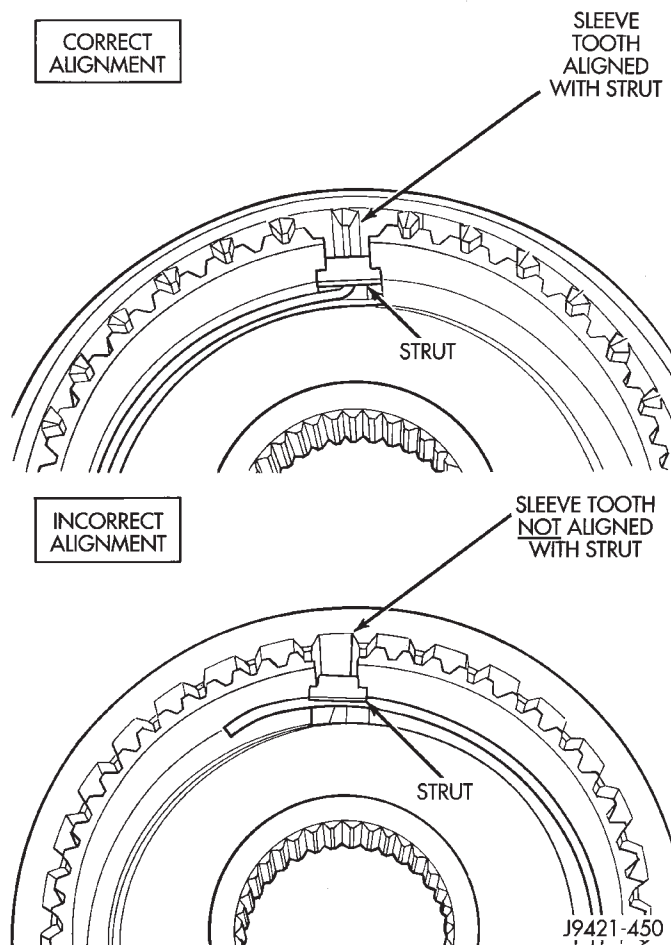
Correct Alignment Of Struts And Sliding Clutch
